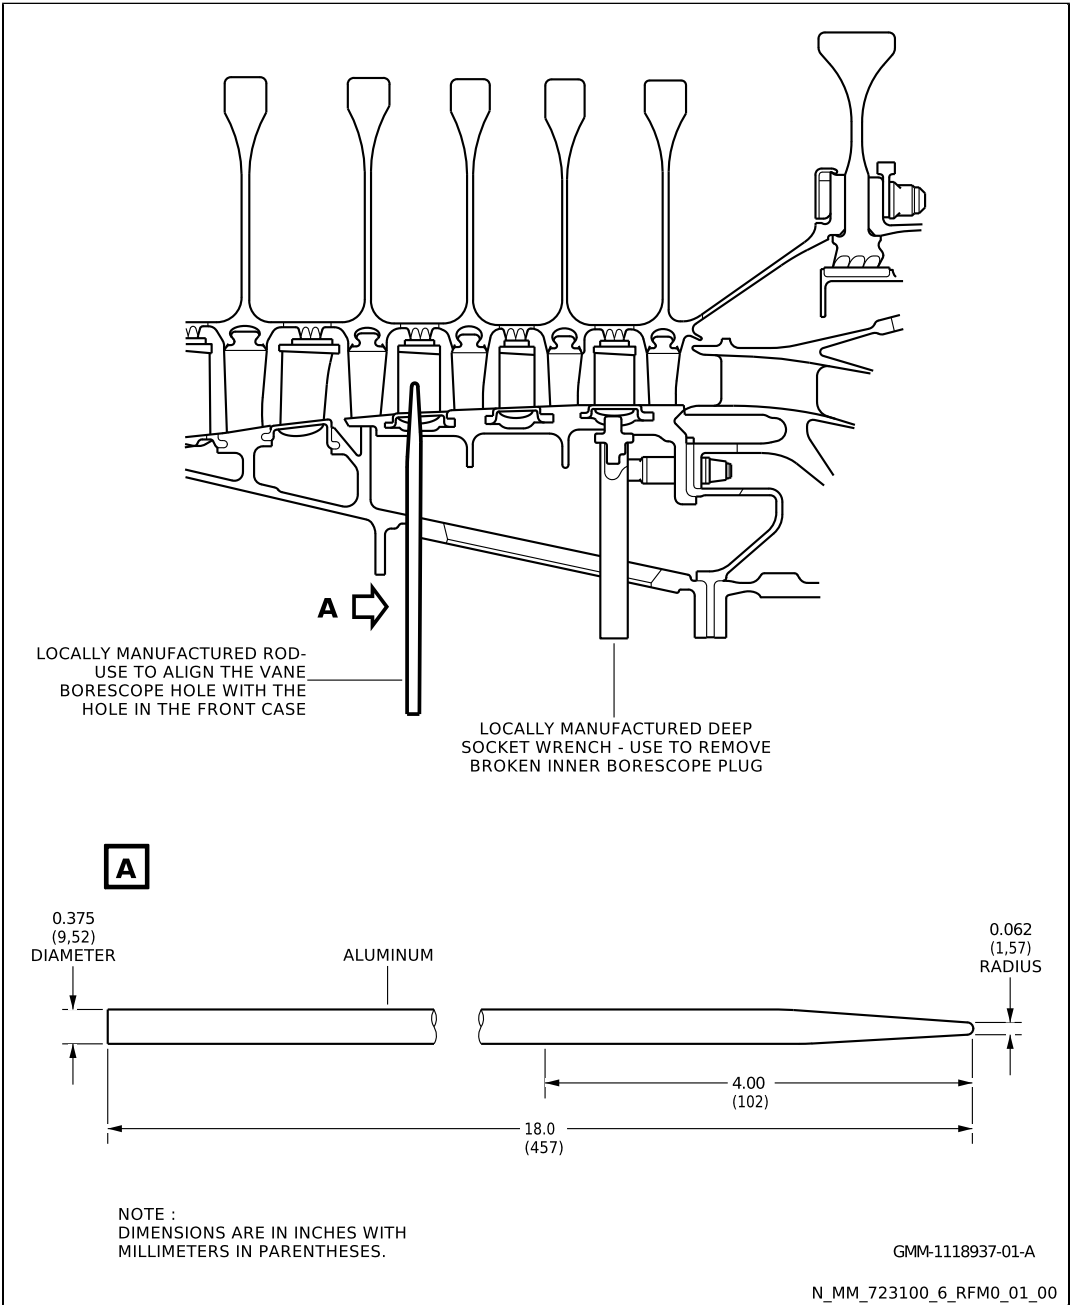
A (SHEET 1) - Locally Manufactured Alignment Rod
